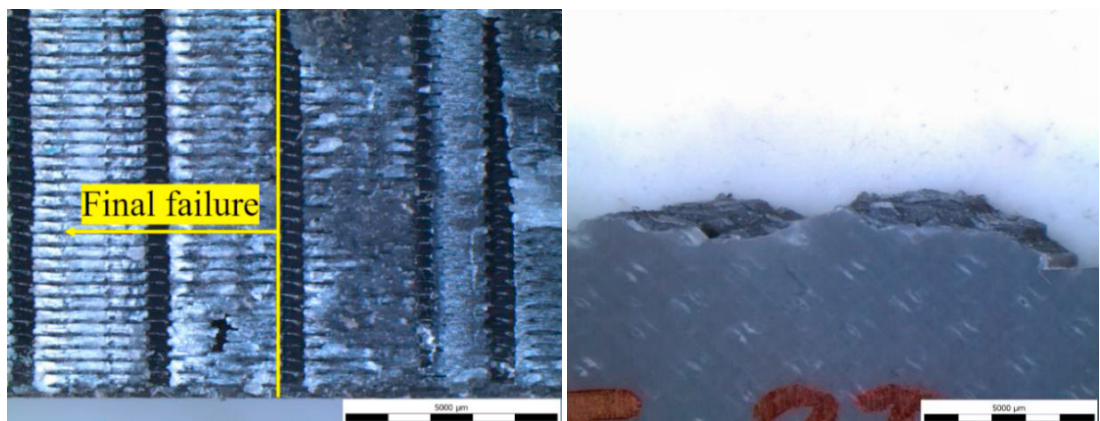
Fracture surface of 0.1 mm regular CT specimen: Top view (Left); Side view (Right).
